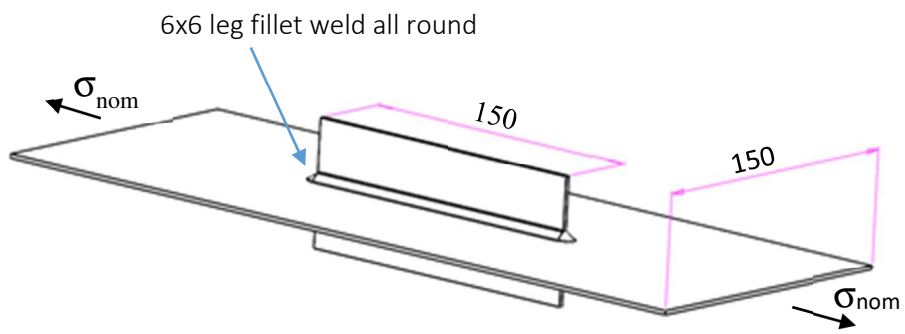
Longitudinal non-load-carrying fillet weld under tensile loading. Plate thickness 2 mm (data from [8])
